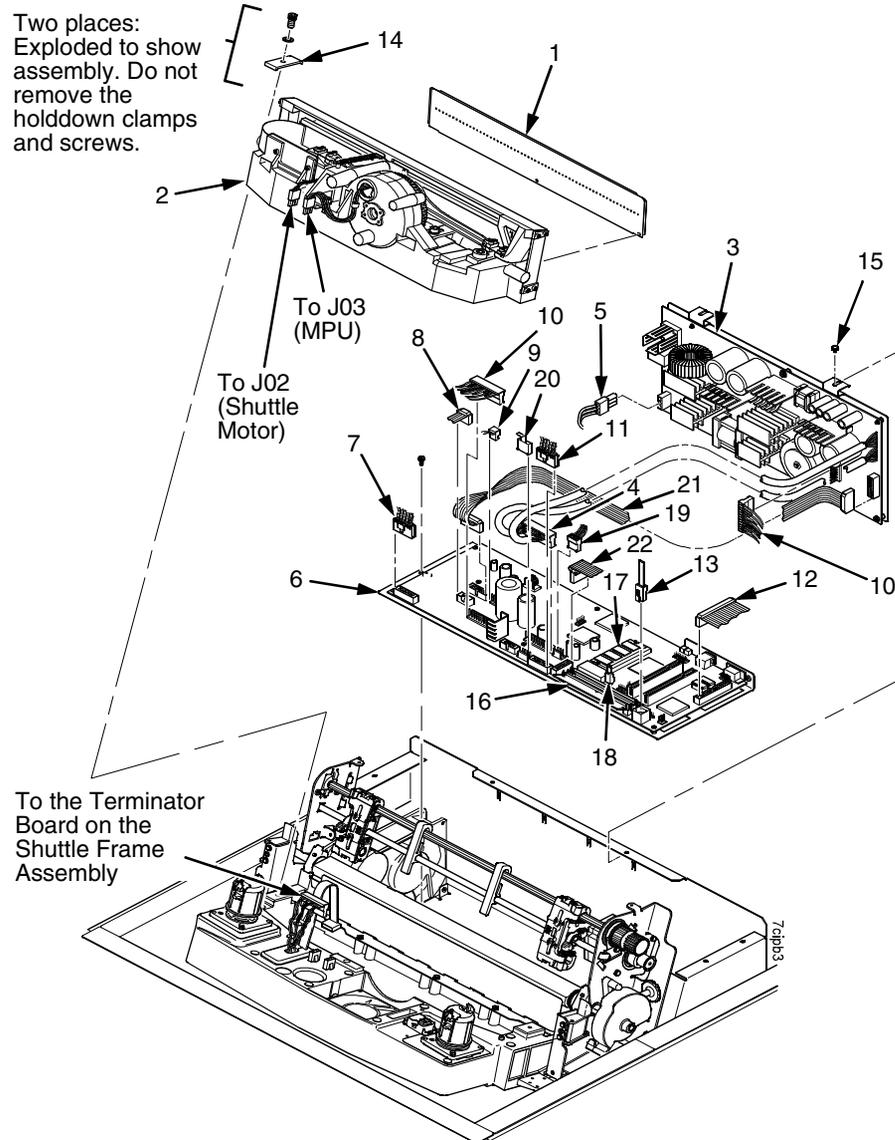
This illustrated parts breakdown shows the shuttle assembly and the circuit boards inside the card cage.
